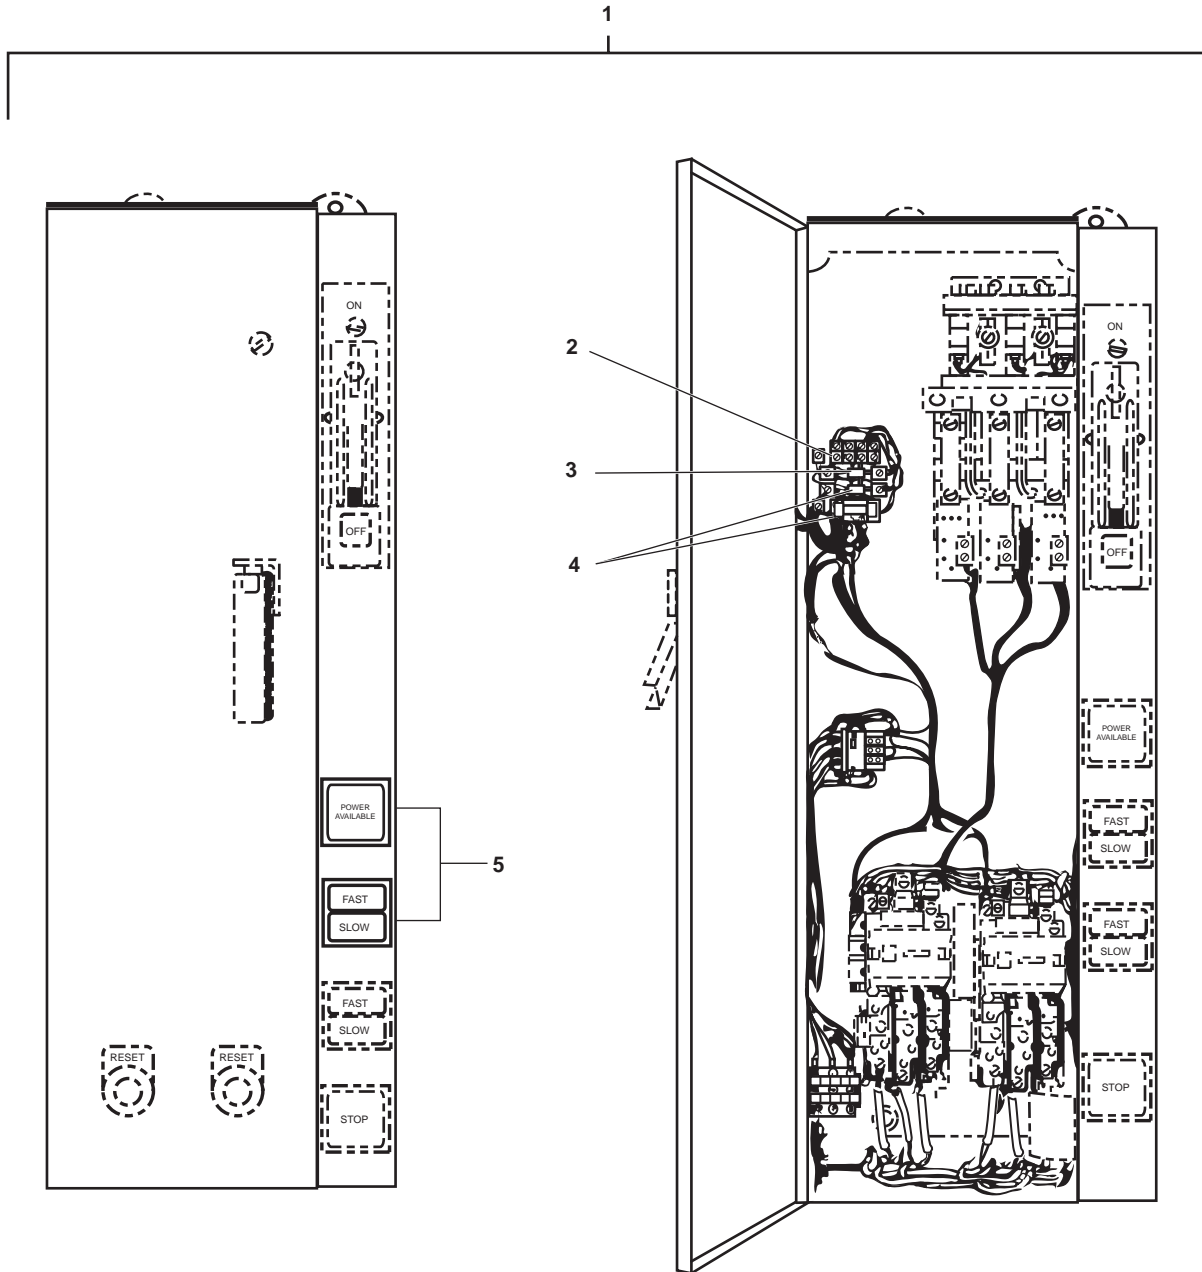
Engine Room Supply Fan 1 & 2 Motor Controller
